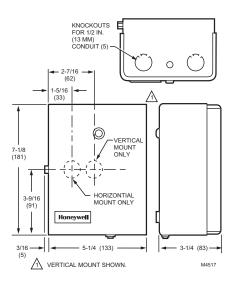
R8182D,E,F installation dimensions in inches (millimeters).
